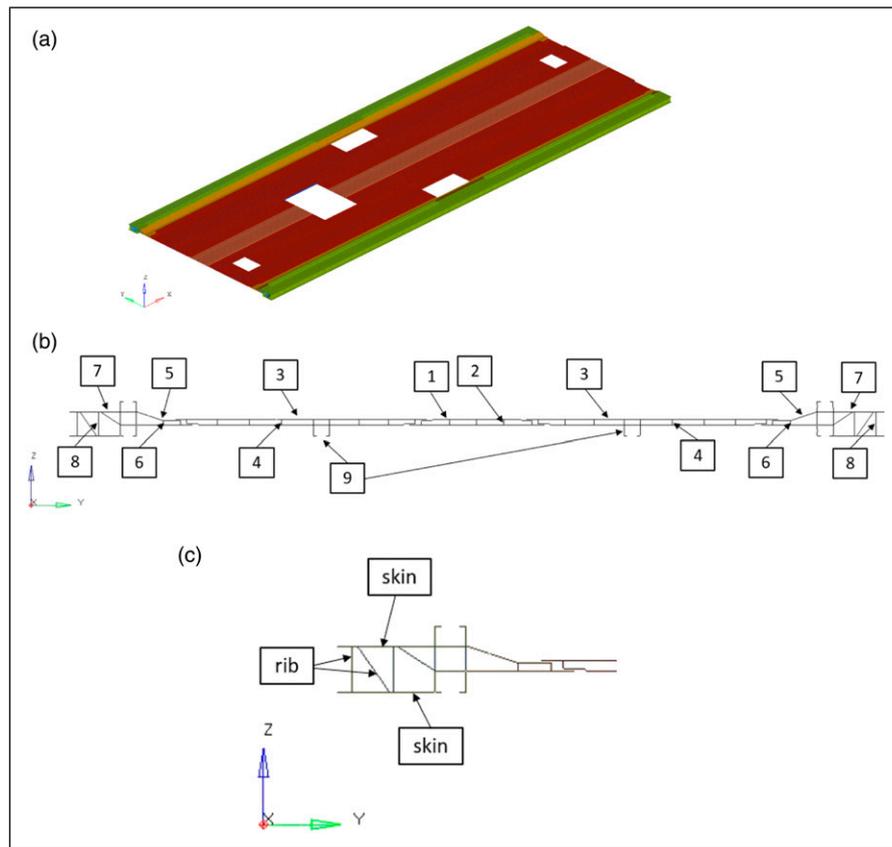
Optimized components of the roof assembly: (a) Isometric view, (b) Cross-section view with references, (c) Detailed view for skin and rib.
